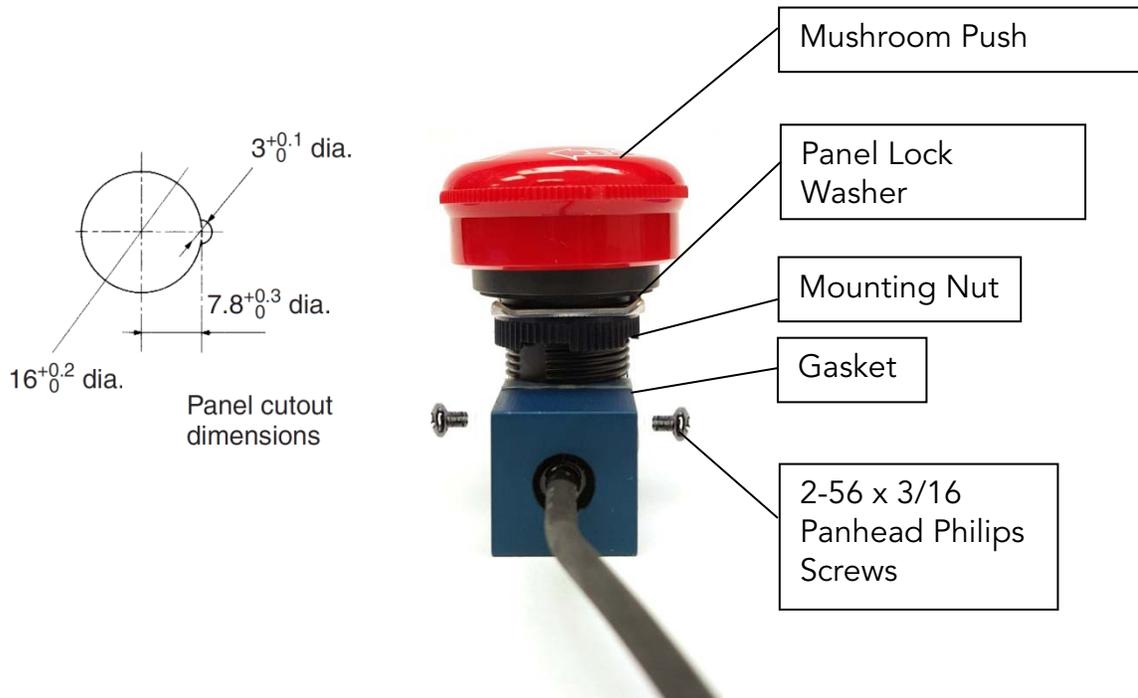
Panel Cut Out Dimensions and Assembly Hierarchy of Emergency Switch
